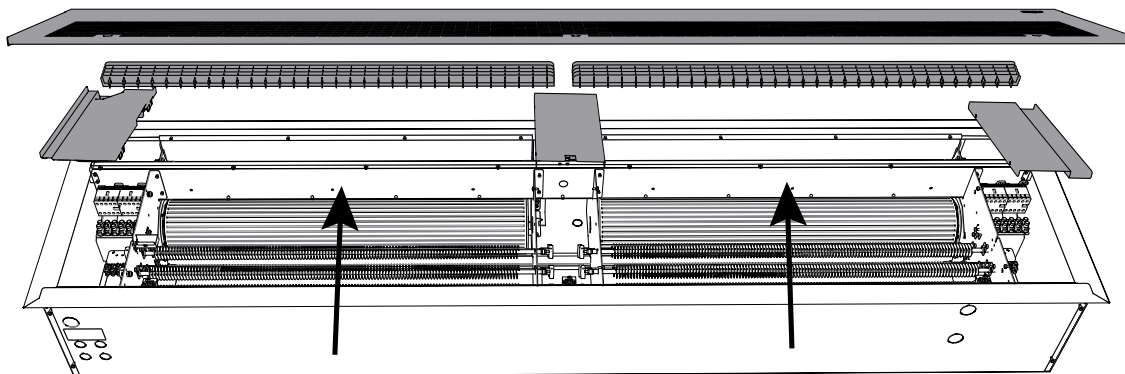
In order to mount the brackets, remove the service hatch, outlet grille and covering plates.
